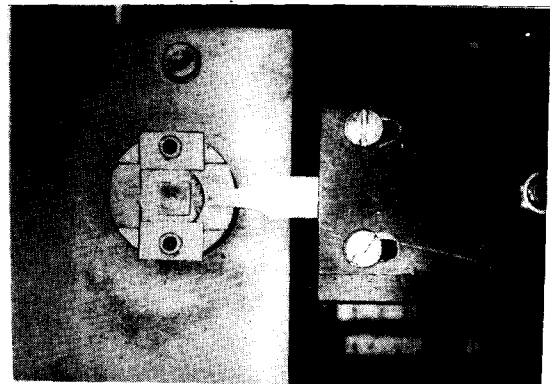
Mounted sample in the fixture of shear strength testing machine.
